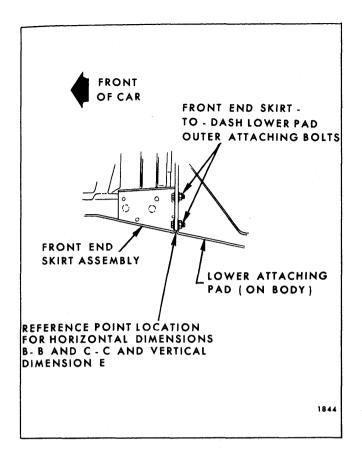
Front End Skirt-to-Dash Lower Attaching Pad
